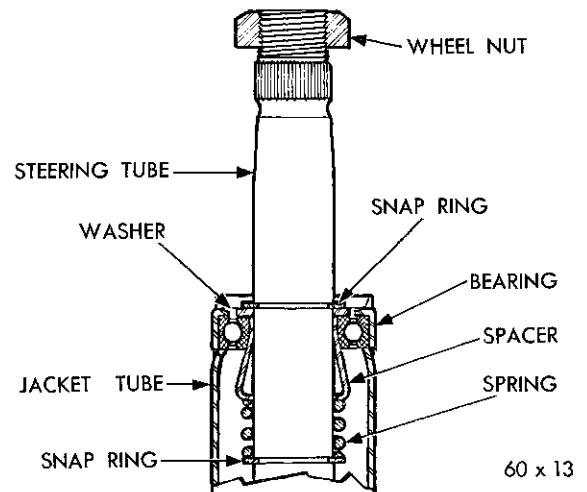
Jacket Tube Installation (PC-1, 2, 3 and PY-1)
